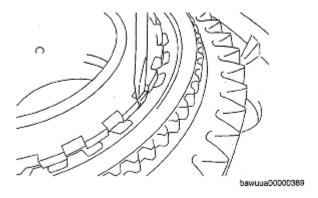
Prying Back Crimps Locking Washer Courtesy of MAZDA MOTORS CORP.
